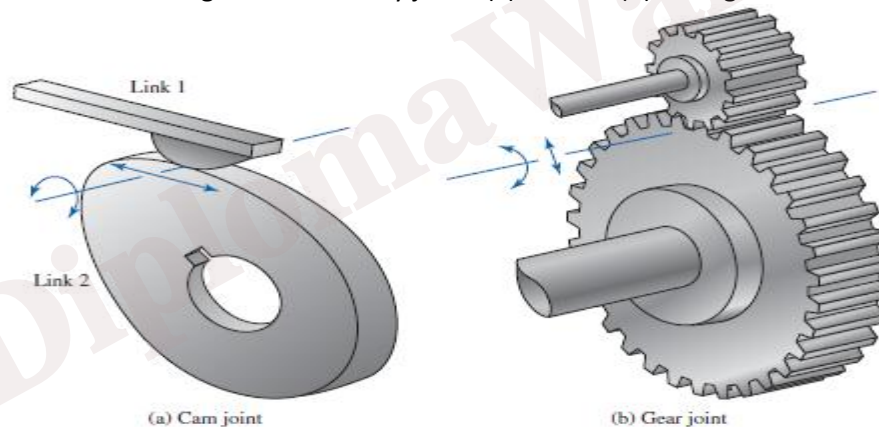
Higher-order joints (a) Cam joint and (b) Gear joint.
